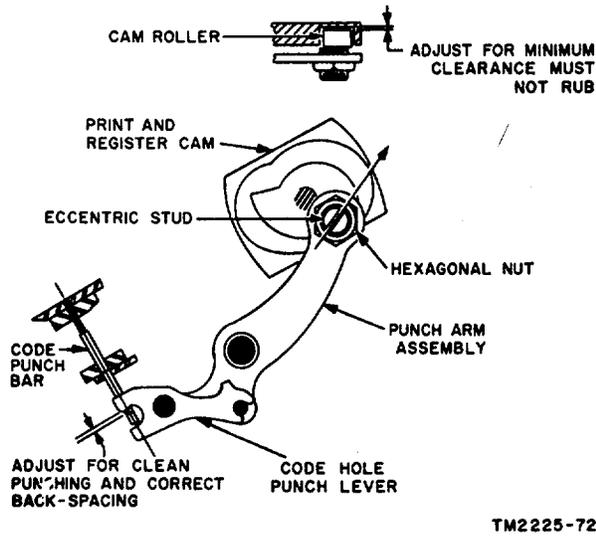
Code hole punch levers and cam roller clearance adjustment.
